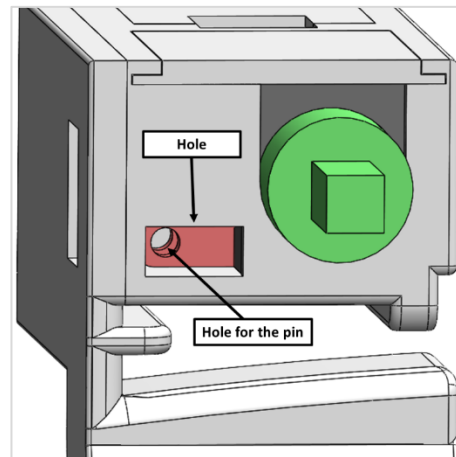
Detailed View of the Hole Left for Assembly Purpose
